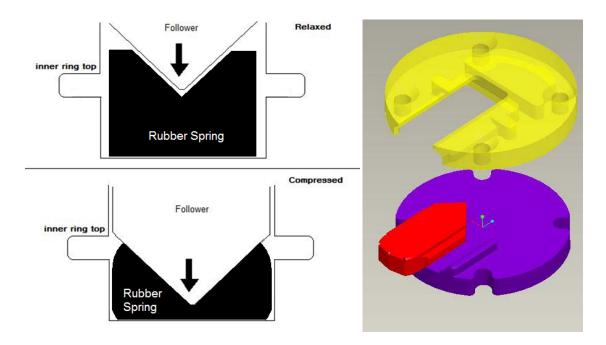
Rubber block acting as a spring (contained in the inner ring top half) on left and inner ring assembly on right
